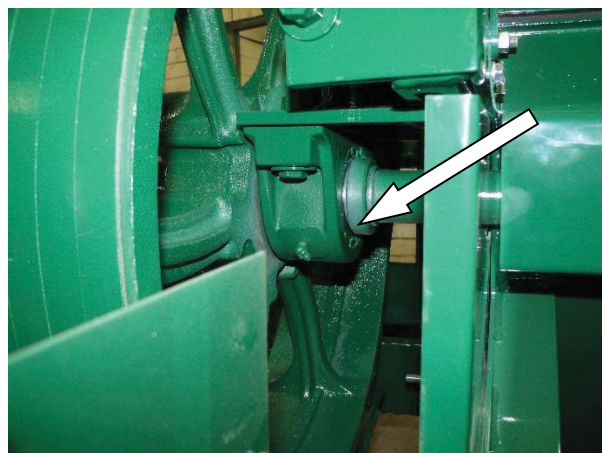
Jack Shaft Front Bearing, Front (Shield Removed For Clarity).
